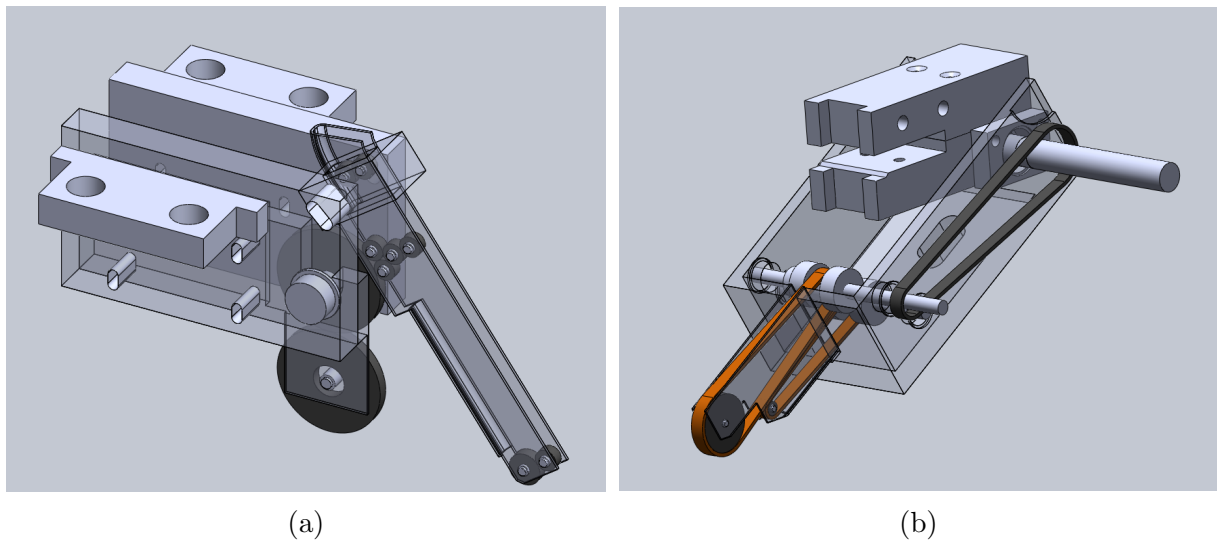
(a) First active feed nozzle, shown without belts installed. (b) Second active feed nozzle design.
